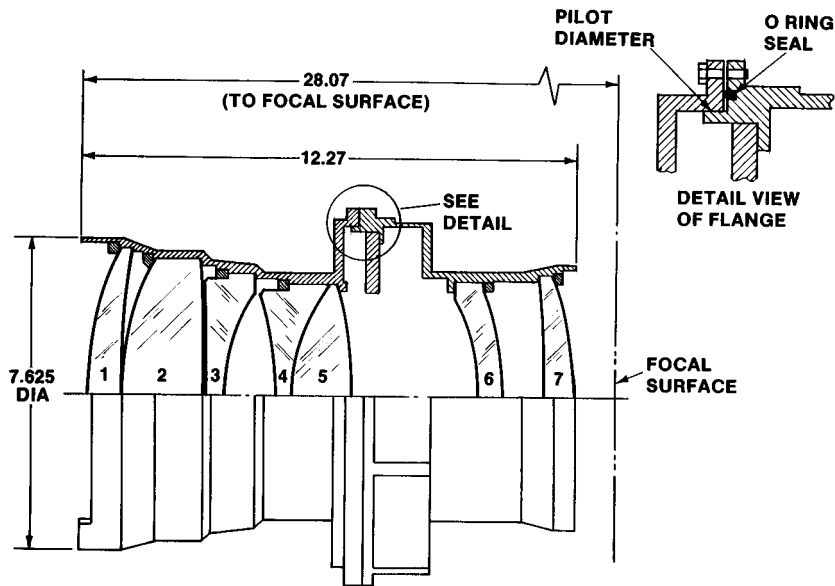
Sectional view of a 24-in. (61-cm) focal length, $f/3.5$ aerial camera objective lens designed for the lathe assembly method of assembly. (From Bayar, M. 1981. *Opt. Eng.*, 20, 181.)
